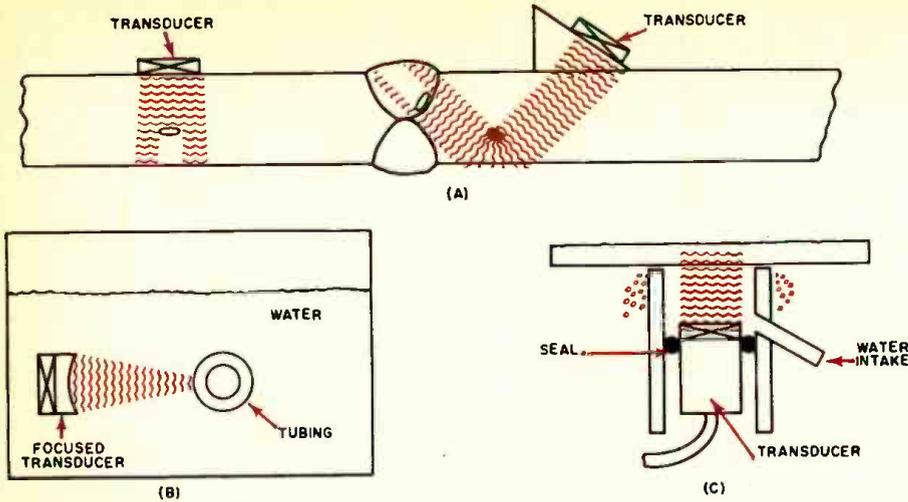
(A) Two basic testing techniques—straight beam and angle beam. Angle-beam testing is useful in detecting poorly oriented flaws. (B) Focused transducers are used in immersion testing to intensify and direct the sound beam. (C) Bubbler transducer uses continuous-flow water column for uniform sound coupling. This technique is most useful in high-temperature applications to prevent transducer damage.
